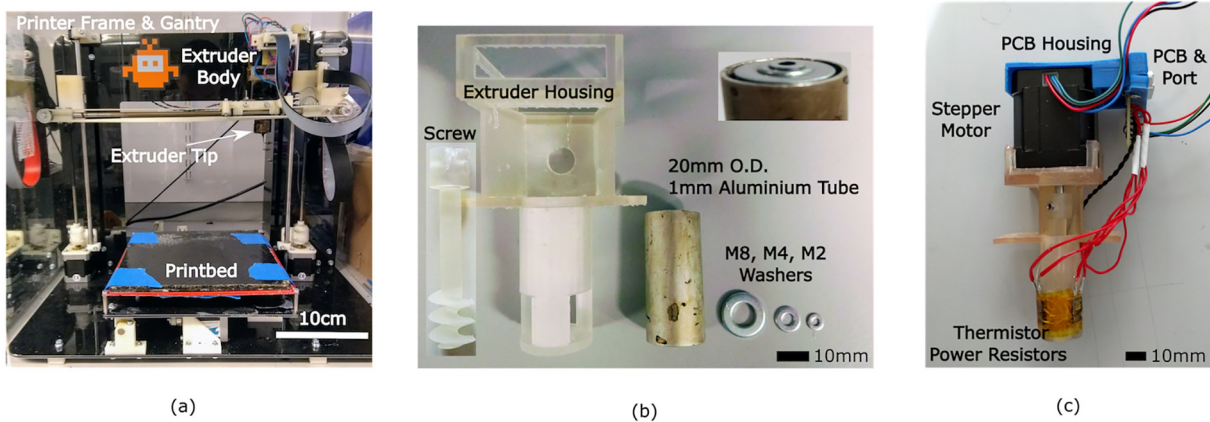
Experimental: (a) photo of whole system, (b) photo of extruder components, (c) photo of complete extruder.
